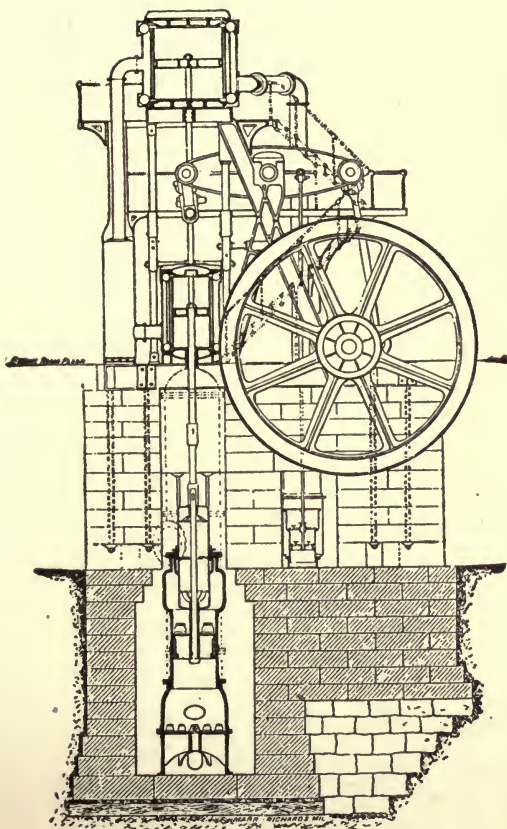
Sectional View of Reynolds Beam Pumping Engine.
